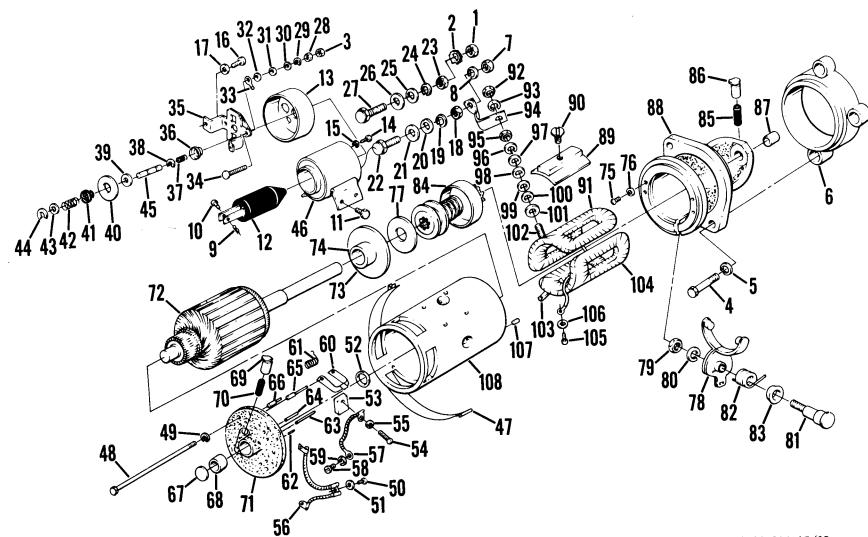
Starter and solenoid, assembly and disassembly (Models LE 300 and LEW 300).
